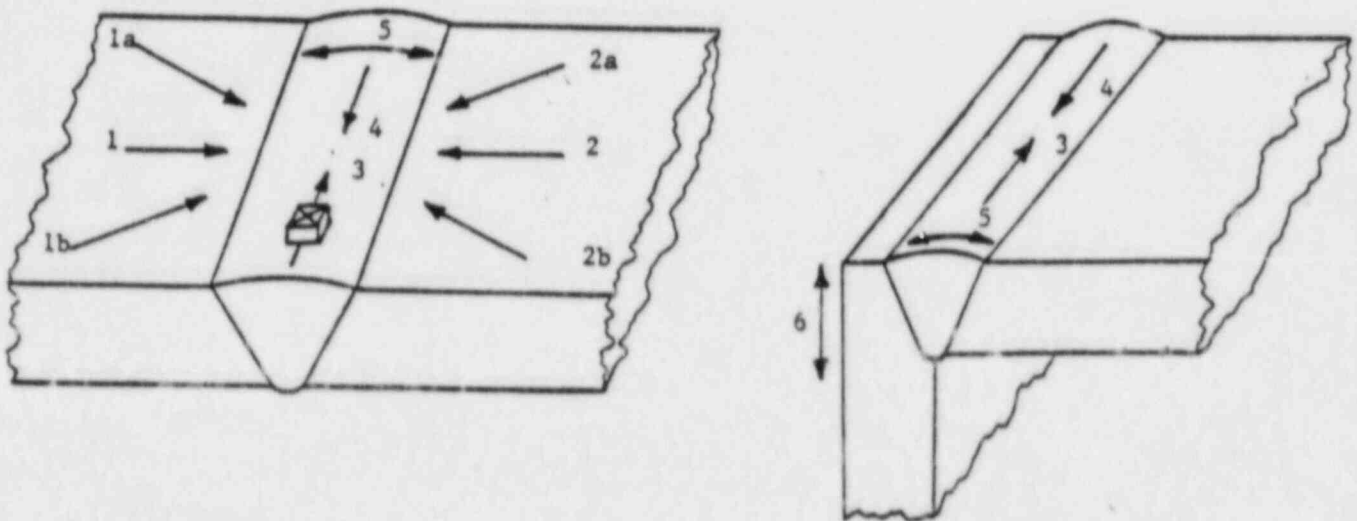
EXAMPLE OF WELD AREA SCANNING
